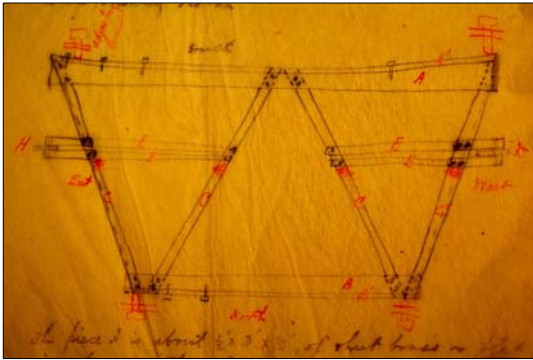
Plate carriage track drawing showing the arrangement of the curved wheel guides (Campbell Copy Book – Mary Lea Shane Archives).
